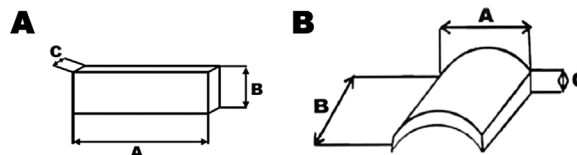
Geometry of the exposed materials: A) 15Mo3, B) T22, T23 and T91
